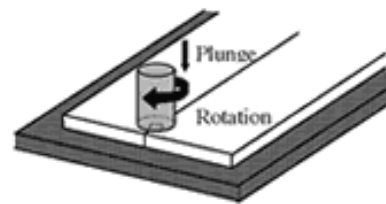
Schematic diagram of friction stir welding [88].
